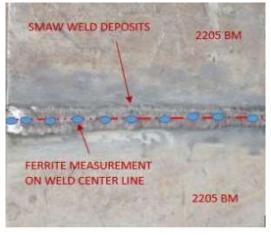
Ferrite measurement on 2205 weld deposits centre line using Feritscope Instrument
